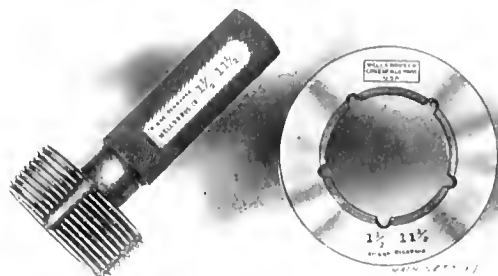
Plug and Ring Gages for Testing Pipe Threads.
